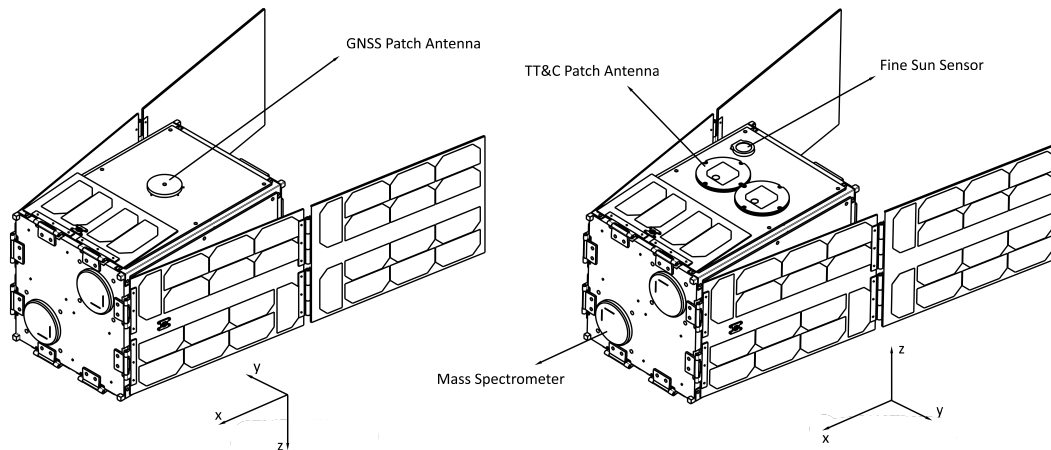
Sketch of the external layout of SCATTER in top view (left) and bottom view (right).
